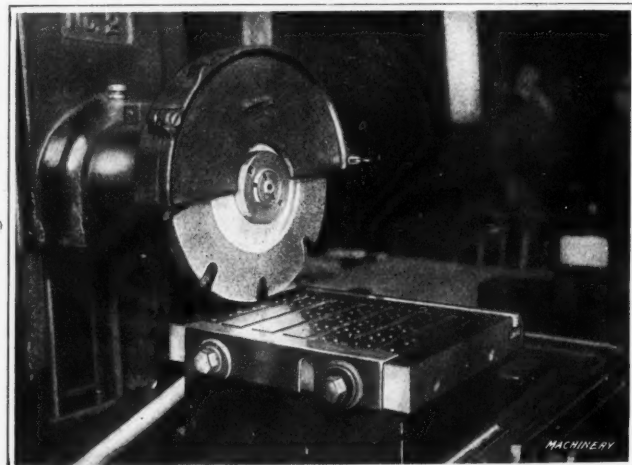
Method used in holding a Number of Very Thin Pieces on a Heald Magnetic Chuck
